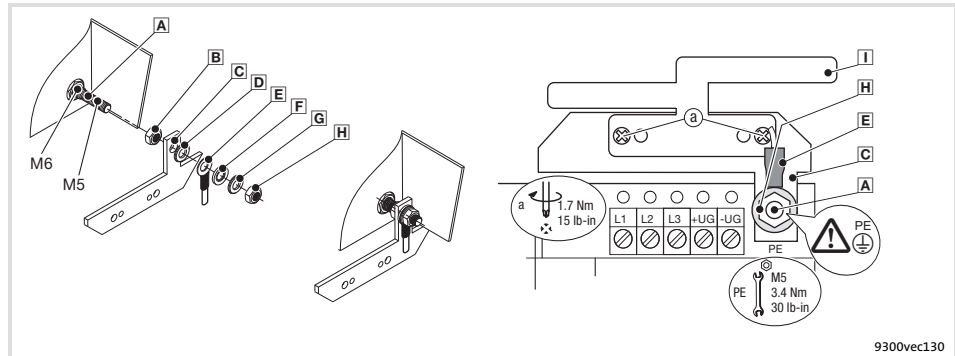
Installation of shield sheet for drive controllers 0.37 ... 11 kW
